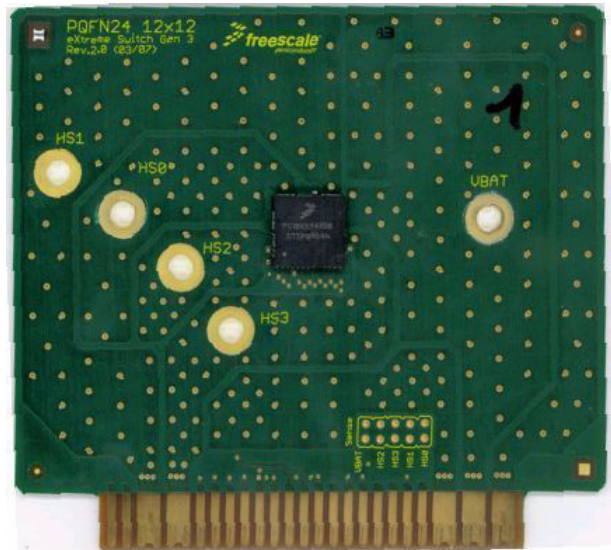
PCB #2 (coupon Board; High Thermal Conductivity) with eXtreme Switch Mounted
